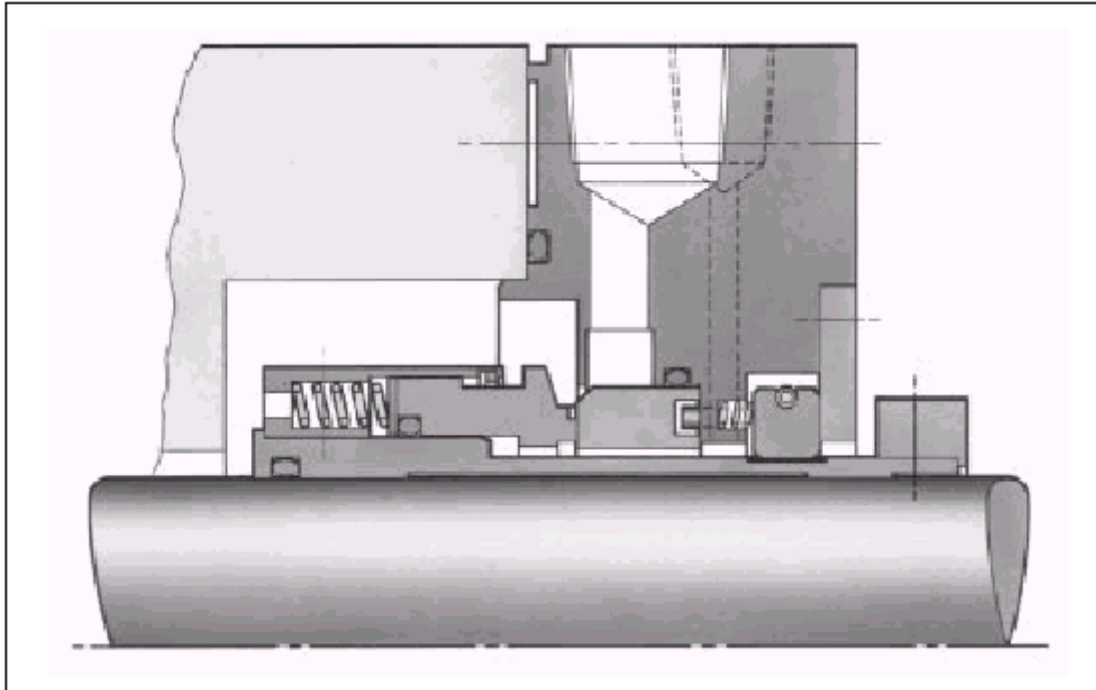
Cross-section through a single mechanical seal with segmented floating spring-loaded throttle bushing
